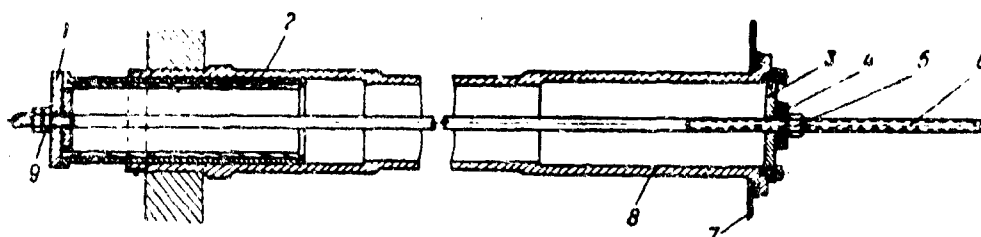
Pressing in the Stern Deadwood Sleeve with a Flange-Rigged Bar from Within the Ship's Hull: 1 - metal closer (flange); 2 - stern deadwood sleeve; 3 - flange with opening; 4 - washers; 5 - pressure nut; 6 - rod; 7 - bulkhead; 8 - stern tube; 9 - nut and locknut.
